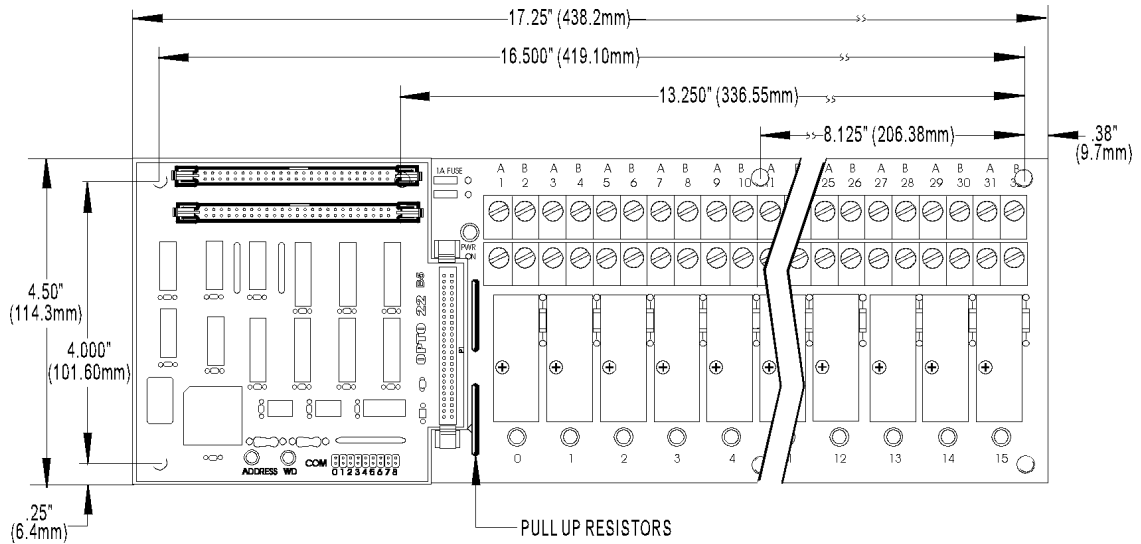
Mounting Dimensions of the PB16HC with a B5 Installed
